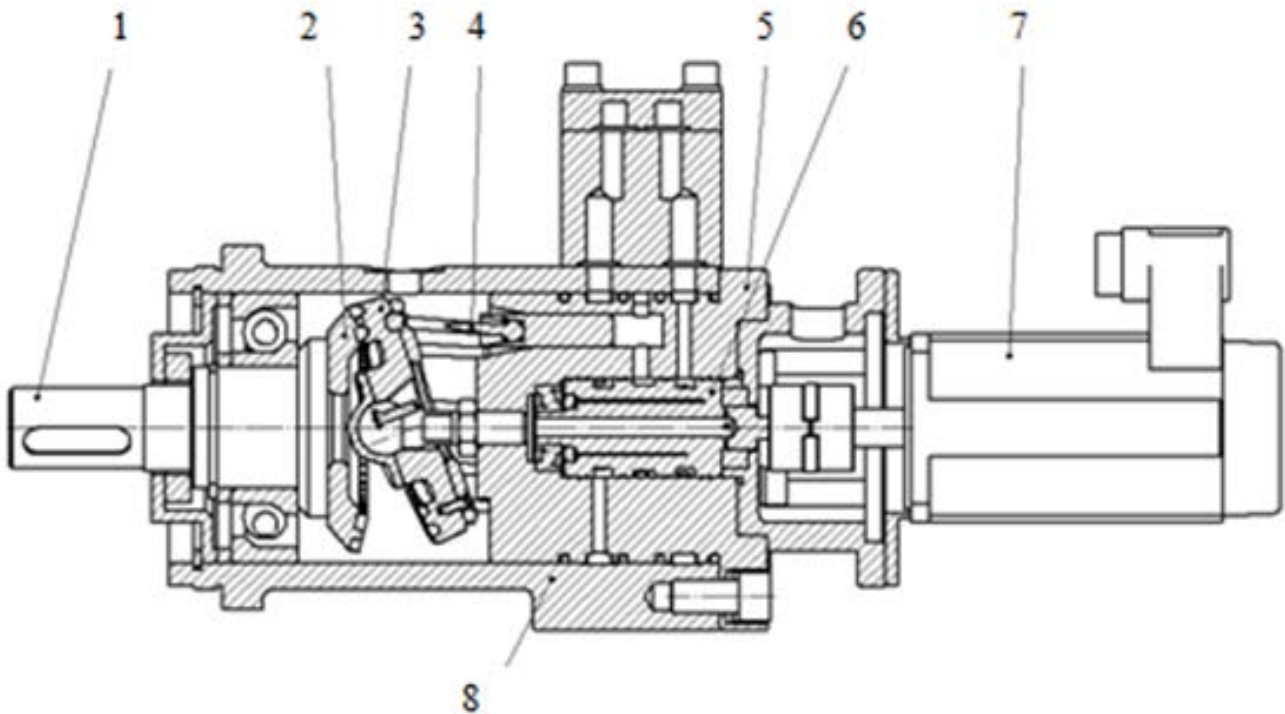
Low speed hydraulic motor: 1 – shaft, 2 – driven gear, 3 – drive gear (tilted disc), 4 – piston, 5 – piston block port, 6 – distributor, 7 – electric motor, 8 – housing.
